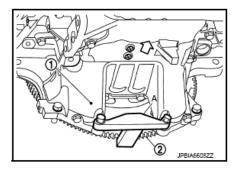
Setting Ring Gear Stopper Courtesy of NISSAN NORTH AMERICA, INC.
